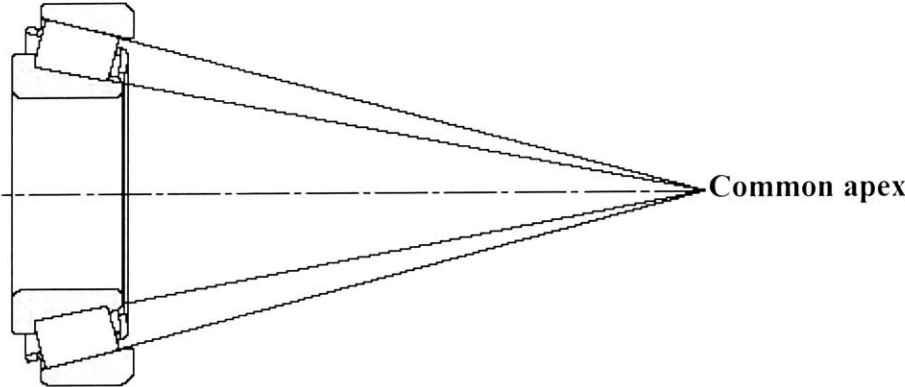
Tapered roller bearing geometry (Courtesy of The Timken Company)
